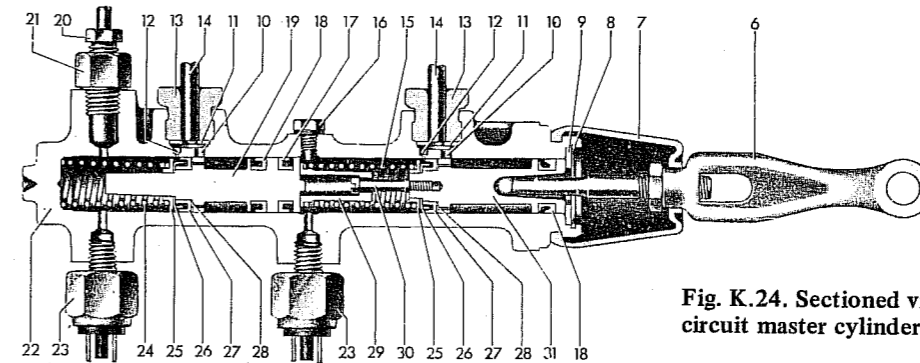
Sectioned view of the dual-circuit master cylinder.
